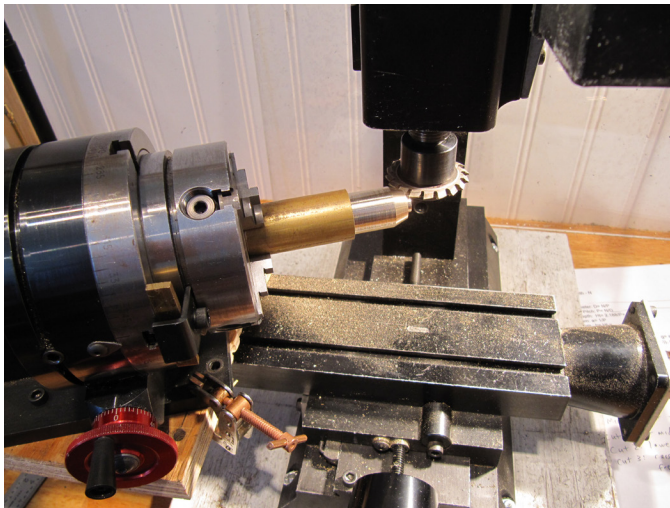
Shows an extension Chris built to hold the rotary table off the side of the mill for cutting the larger gears.
